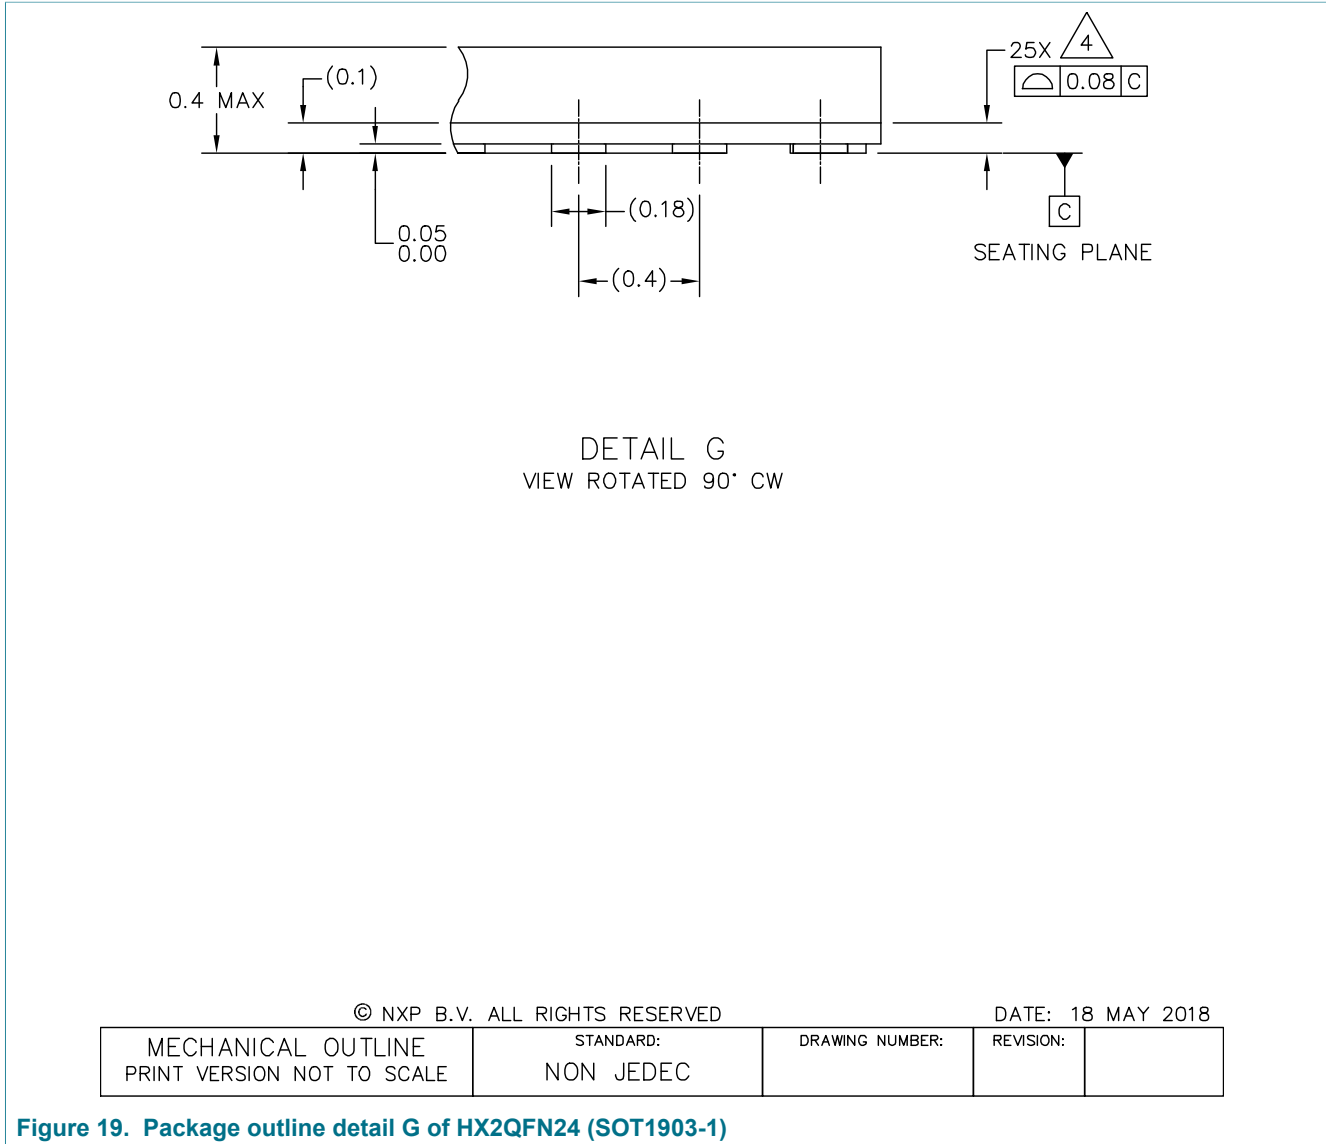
Package outline detail G of HX2QFN24 (SOT1903-1)
